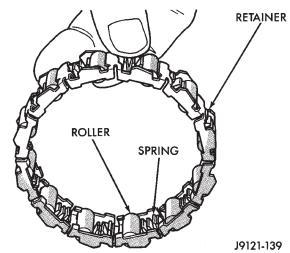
Overrunning Clutch Rollers, Springs, Retainer
